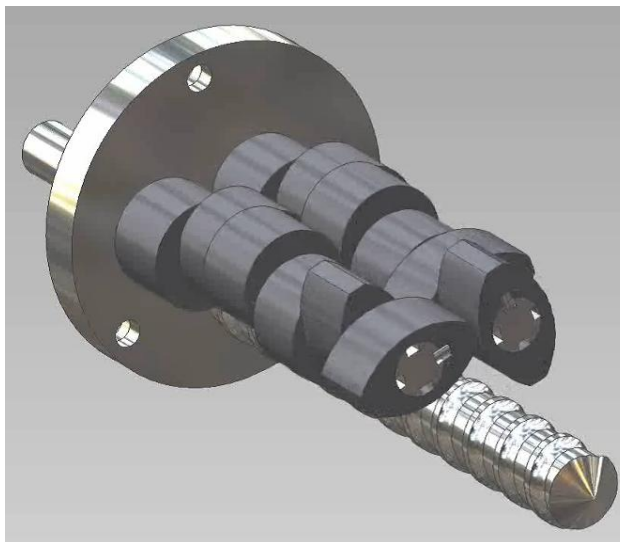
Internal layout of the minimixer showing the 3 screw design
